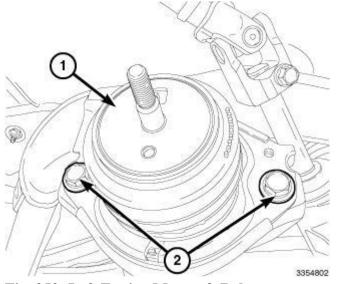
Left Engine Mount & Bolts Courtesy of CHRYSLER GROUP, LLC
